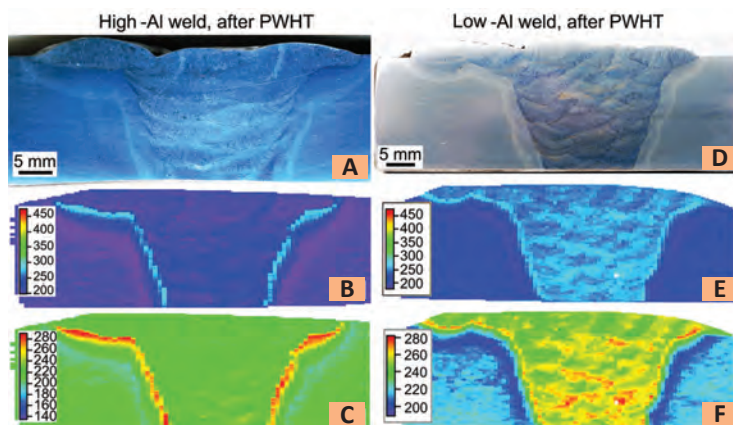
Hardness maps on welds after postweld heat treatment showing lower hardness in fusion zone of the high-Al weld than that of the low-Al weld. A, D — Transverse macrographs; B, E — microhardness maps; C, F — hardness scale changed.
